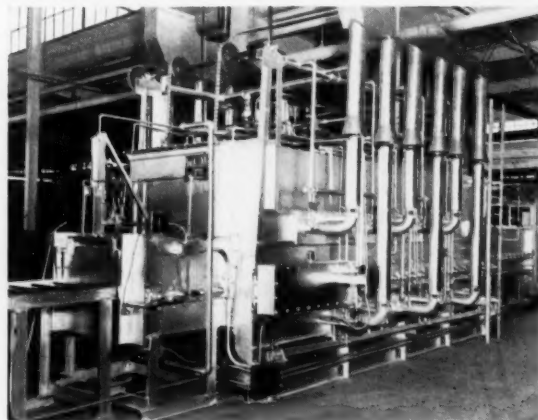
Charging end of a roller hearth furnace for bright annealing copper and steel gaskets. Equipment is cross-fired under and over the roller hearth.
